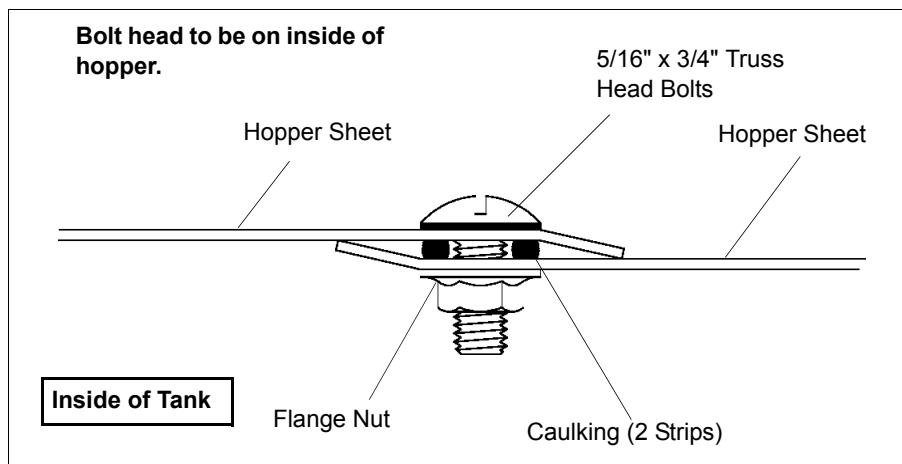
G Hopper Overlap and Bolt Detail for Tanks W/Out Reinforcement Angle
